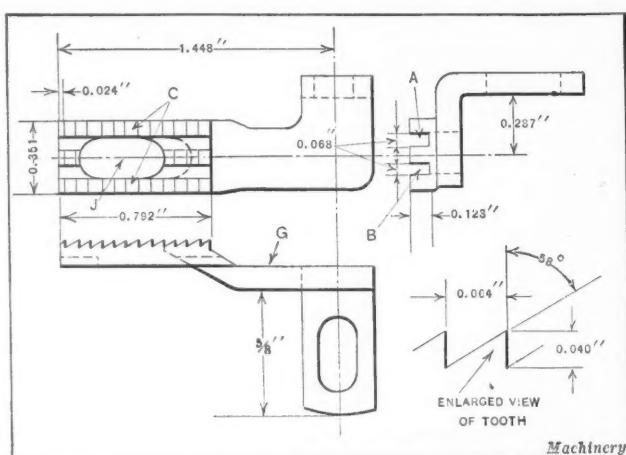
Part milled in Fixture shown in Figs. 2 and 3
